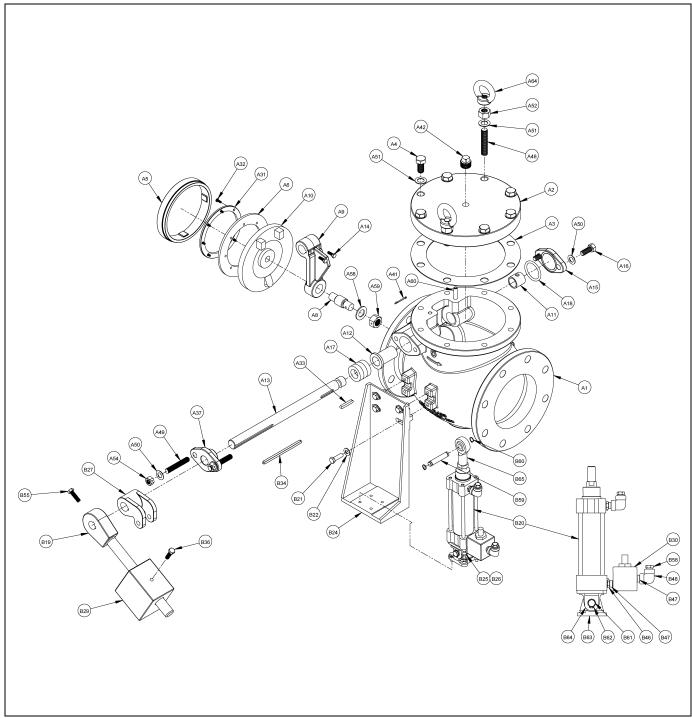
APCO CVS-250/250A Swing Check Valve (with Air Cushion)
